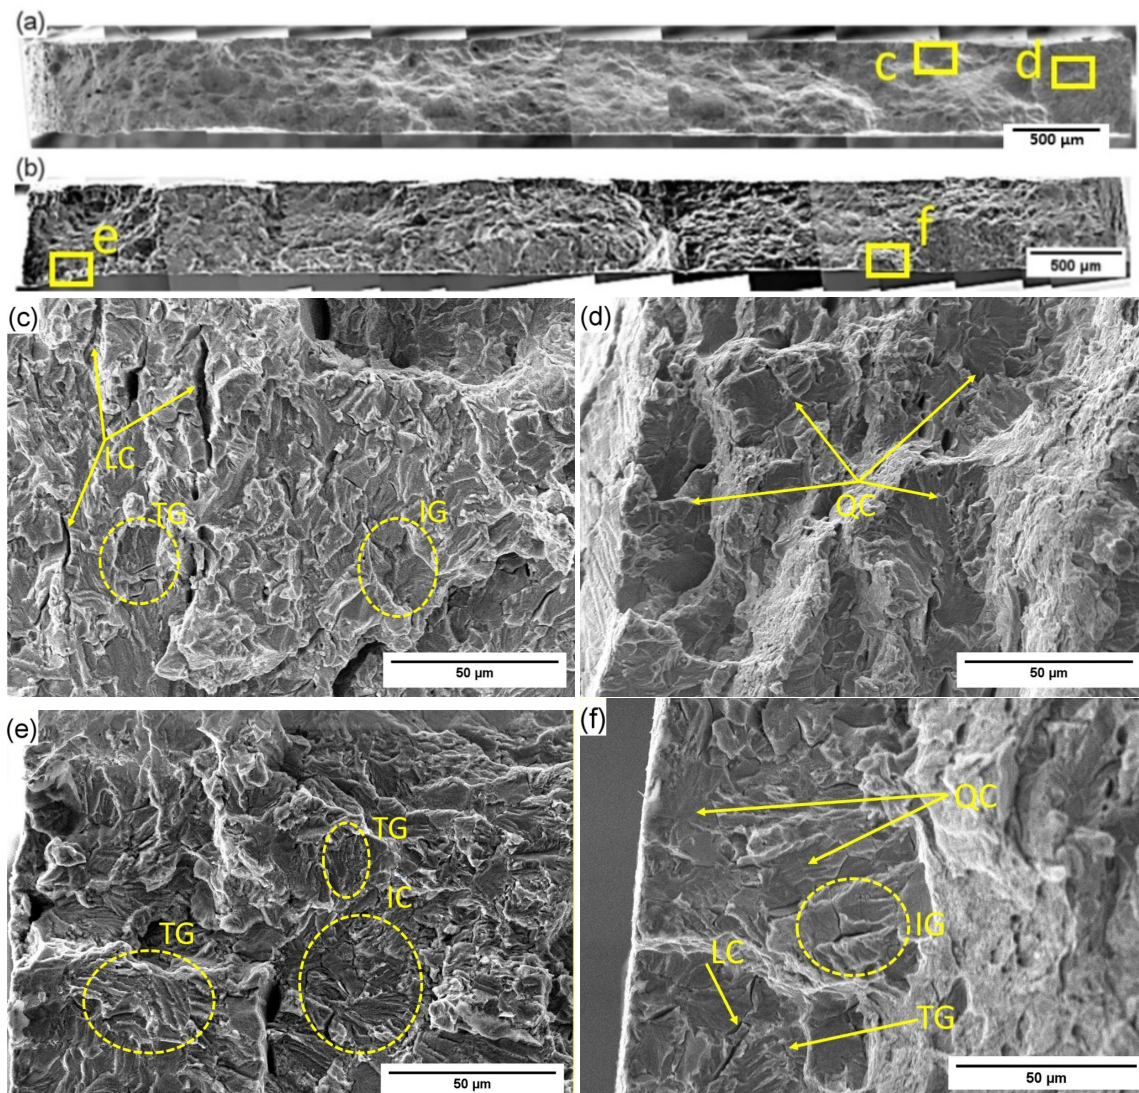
Fractured surfaces of hydrogen-charged tensile tested specimens with PW. (a) General view of the fractured surface of PW-1H; (b) General view of the fractured surface of PW-2H; (c) Transgranular cracks (TG), intergranular (IC) and longitudinal (LC) cracks oriented along the RD in PW-1H; (d) TG cracks in PW-1H; (e) QC facets and planar cleavage facets near the specimen edges in PW-2H; (f) longitudinal (LC) and transgranular cracks.
